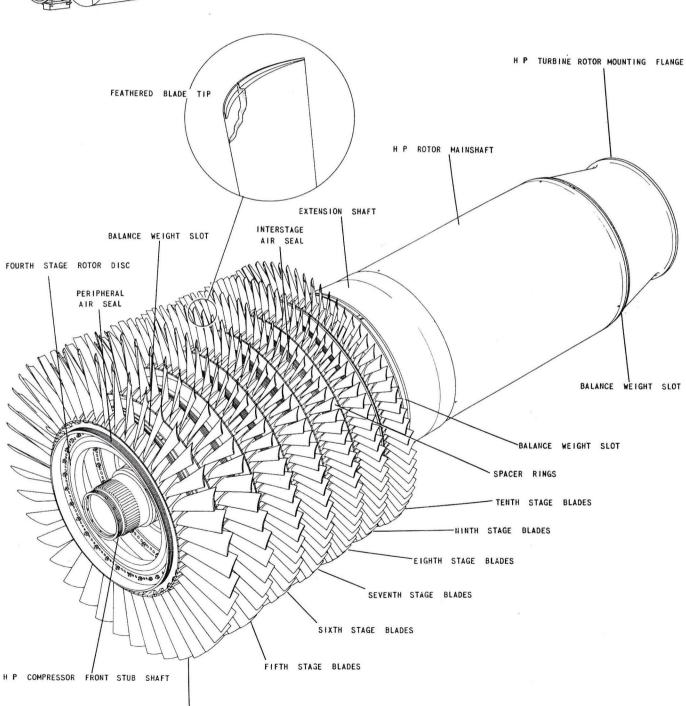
High Pressure Compressor Rotor Assembly
